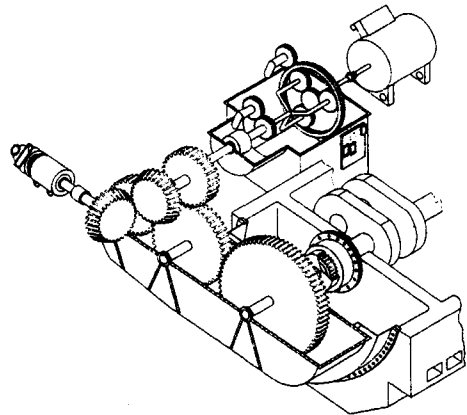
(d) Front Mounted Turbo-Compound System Drive Combined with B&W/RCF Shaft Generator on MC series
